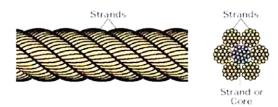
Inner Technora rope core assembly, outer sheath not shown [1]
